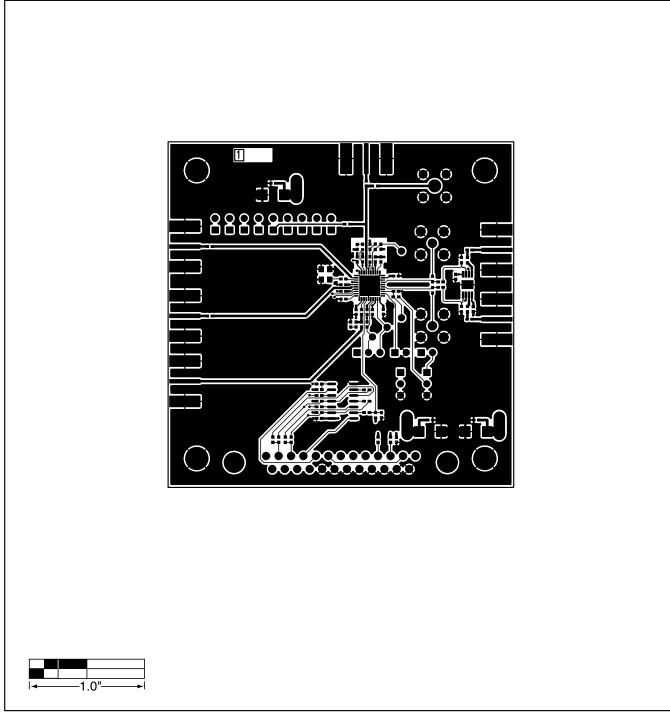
MAX2160 EV Kit PC Board Layout—Primary Component Side
